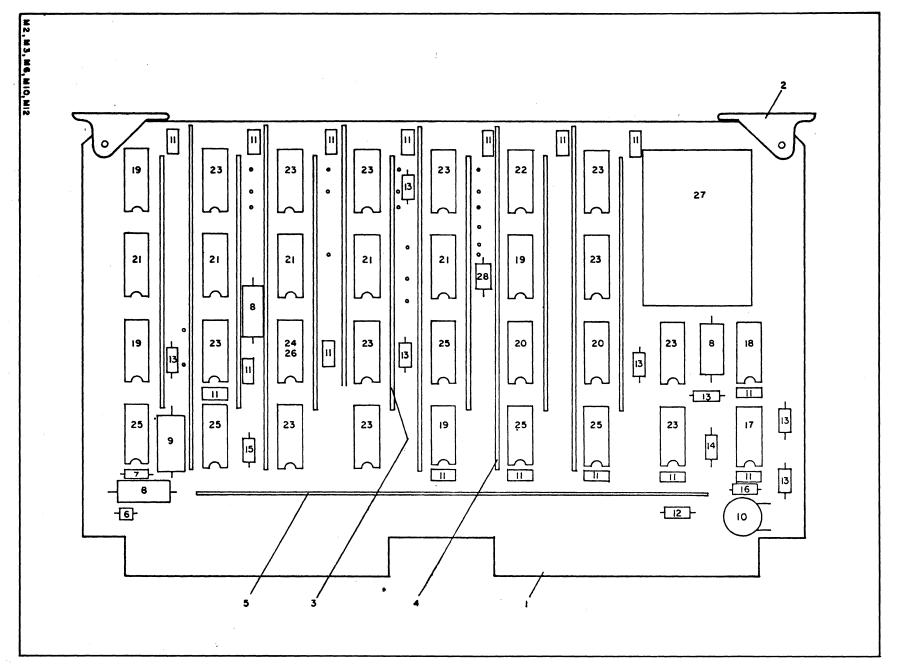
P.C. ASSEMBLY - Clock Card
